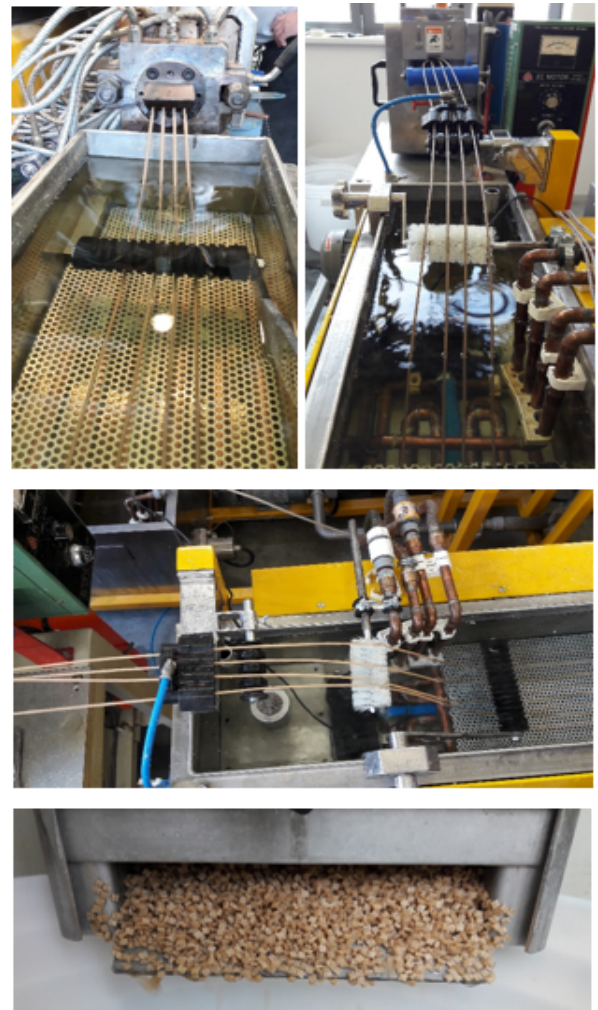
Extrusion and production of composites strings by twin-screw extruder and composites granules by cylindrical shredder
